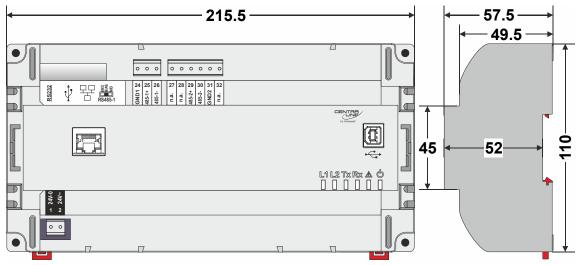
CLIF-CBUSLC (shown: model with onboard I/Os), dimensions (in mm)
